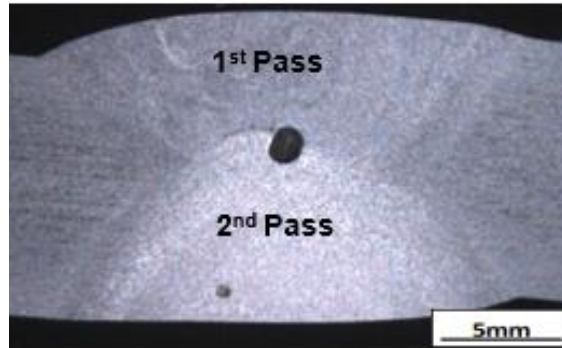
Unprocessed TIG welded 5083 alloy.
